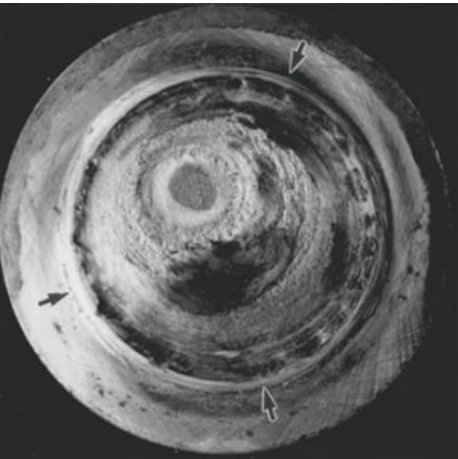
Failed compressor rotor shaft. Fracture occurred at radius between large and small diameters. Arrows indicate some of fatigue origins. Original magnification: 1×
